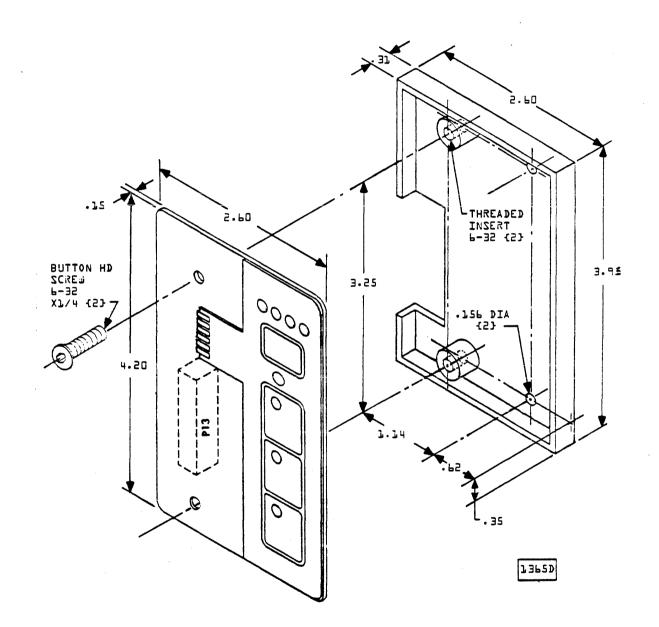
POWER SUPPLY PHYSICAL DIMENSIONS
